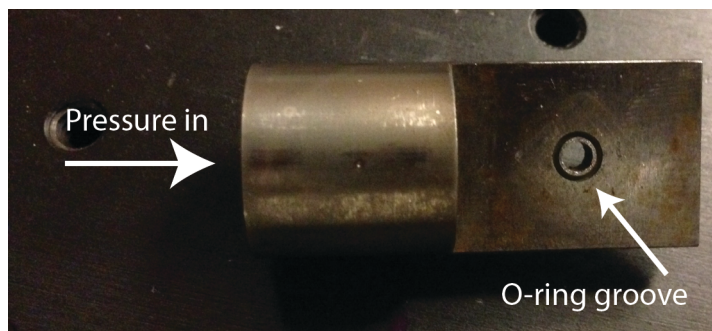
Pressure fitting showing groove where the O-ring fits and pressurization fluid inlet. The liquid emerges through the hole surrounded by the O-ring groove, which is placed above the sample.
